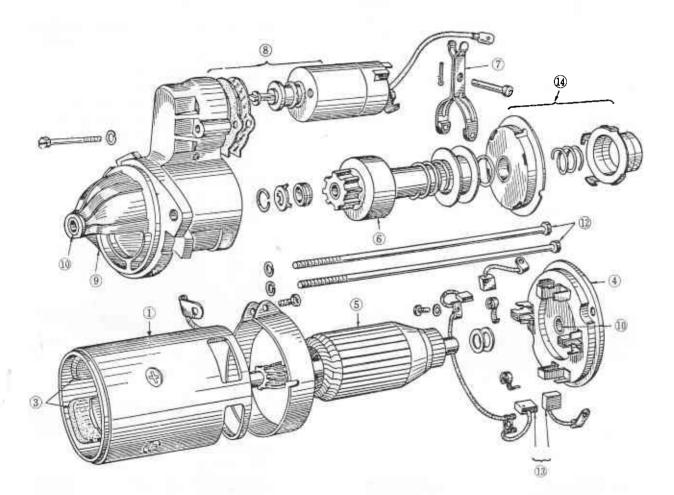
Component Parts of Starting Motor (HITACHI S114-91)
